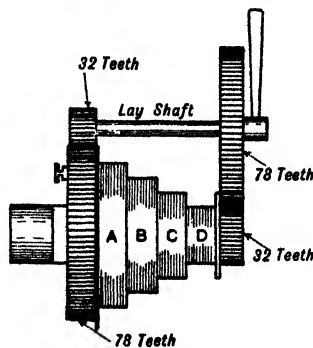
Diameters, A = 10 in., B = 8 in., C = 6 in., D = 4 in.
